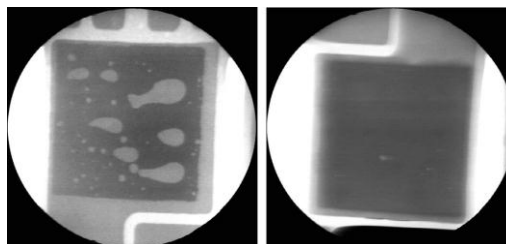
Power chip soldered without (left) and with (right) vacuum process
